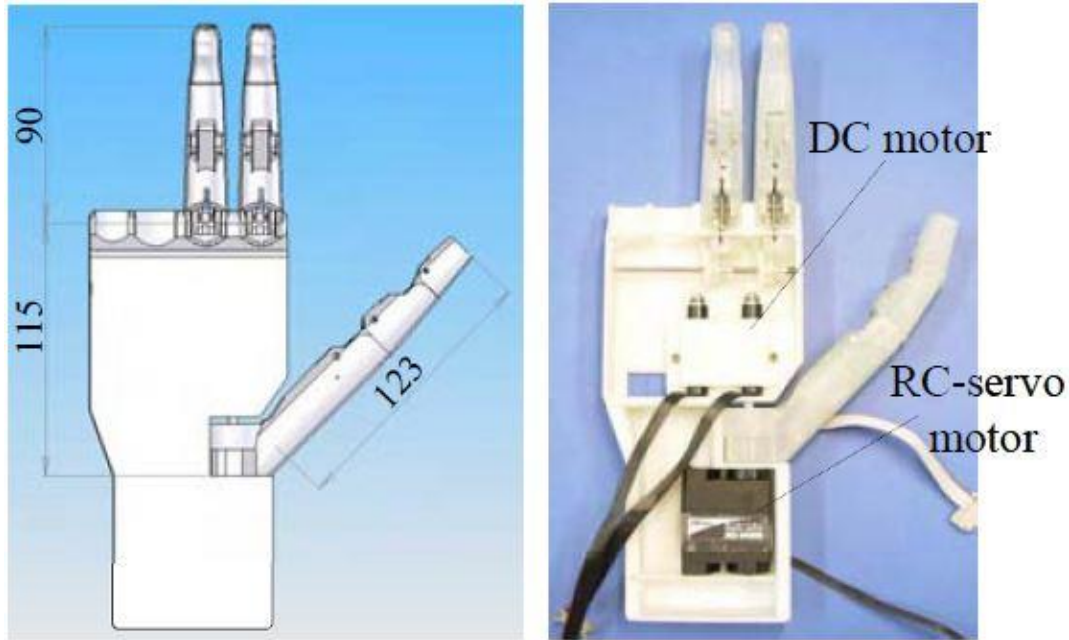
Left: dimensions of the three-finger design (mm), Right: actuators used for the hand
